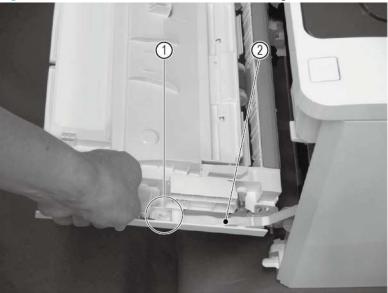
Remove two arms and unhook two springs and remove the MP tray assembly
